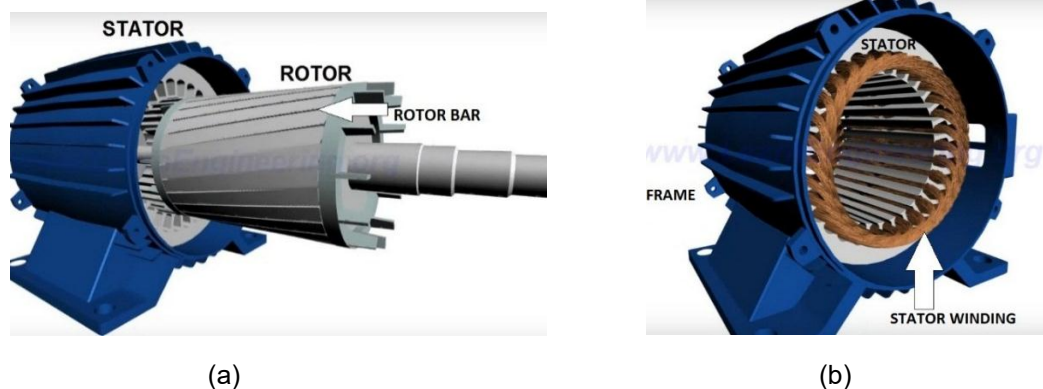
The induction machine (a) The stator and rotor parts (b) the inner part of stator [6.1]
